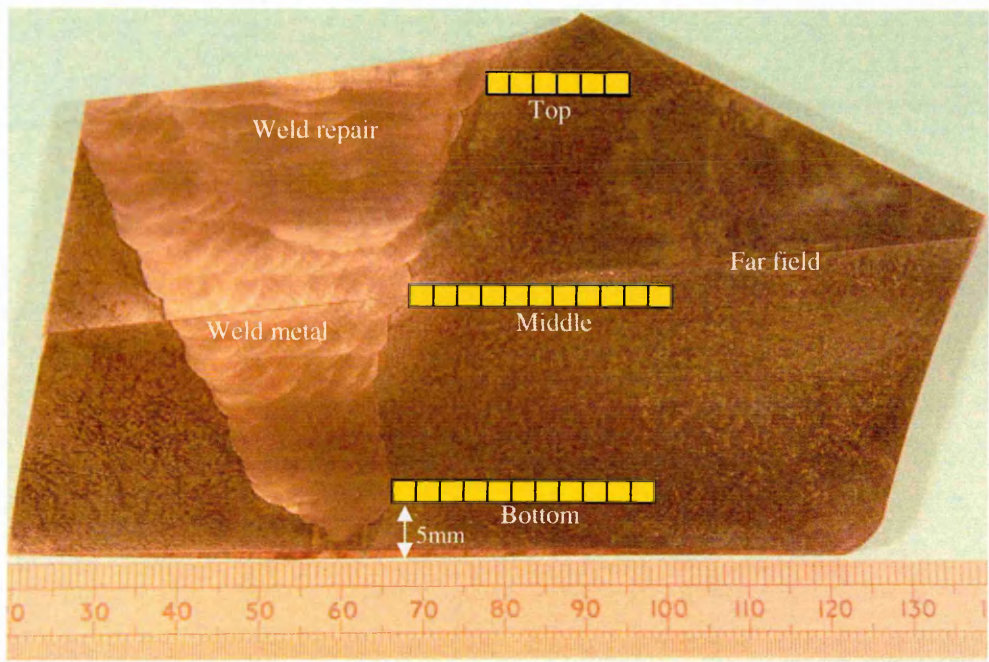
Macrograph of Weld-1 through thickness cross-section showing EBSD measurement areas (shaded zones) and evidence of a weld repair at the top position.
